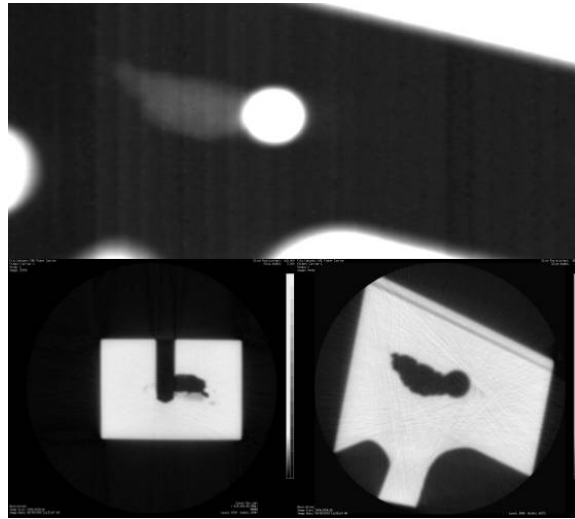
Digital radiograph of a metal casting with a defect adjacent to a threaded hole (top image). CT images taken through the defect are shown below.
